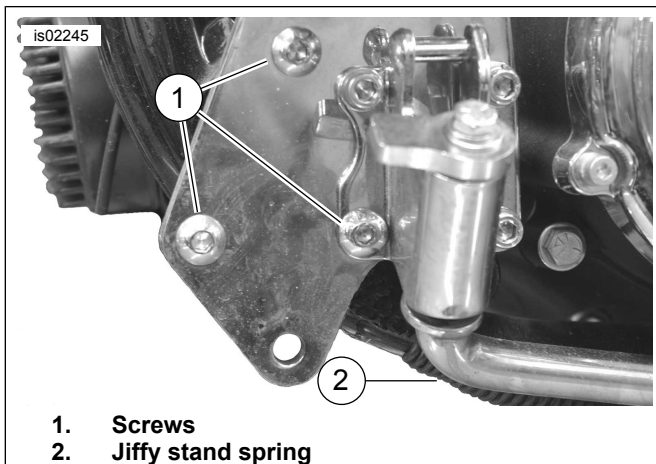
Install the Shifter Mounting Plate Assembly and Jiffy Stand Spring
